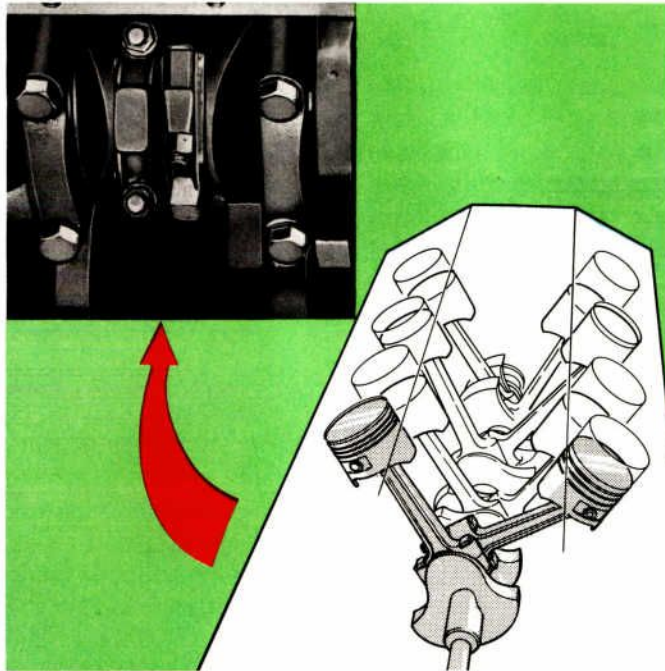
CRANKPIN AND MAIN BEARING JOURNAL PLANES
